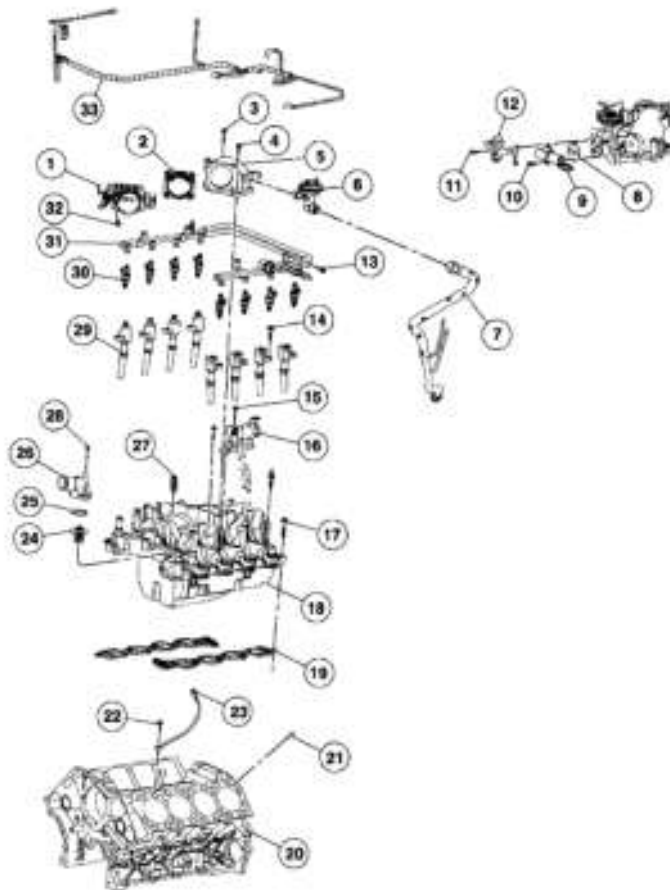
Exploded View Of 5.4L Engine - Upper End Components (1 Of 2)
